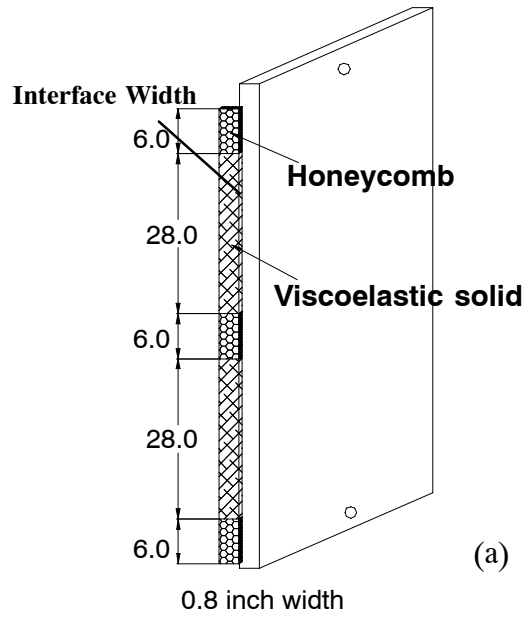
The Detail Dimension of a Damping Panel (unit=inch):
